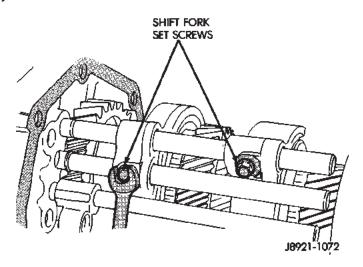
Remove Shift Fork To Shift Rail Bolts
